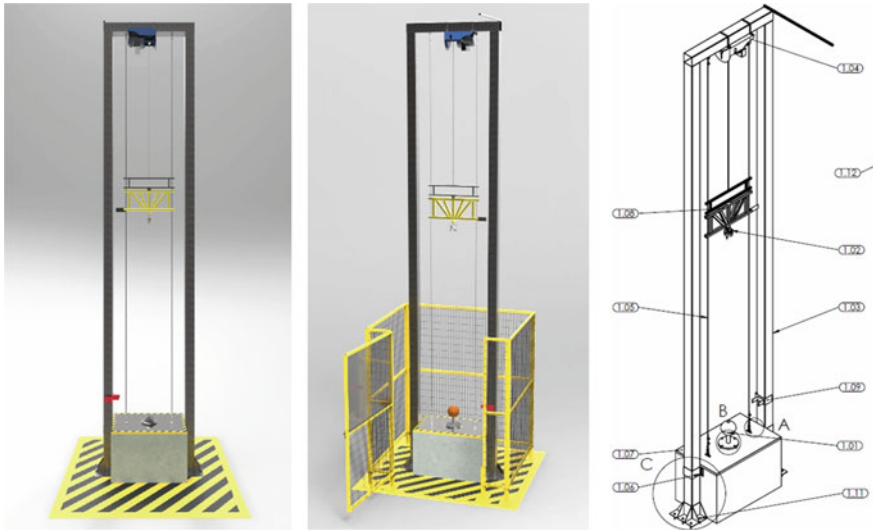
Front, 3D view (with protection system) and drawing of the impact testing machine
